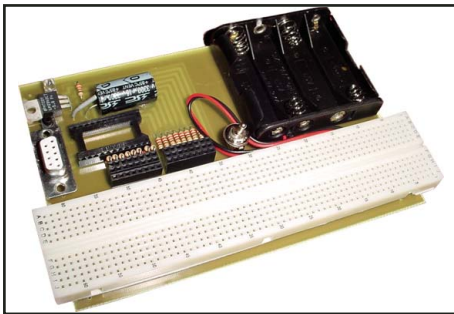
A completed BoRG Board. The PCB is shot and etched by its owner. After drilling the board, BoRG members solder components to their board.
